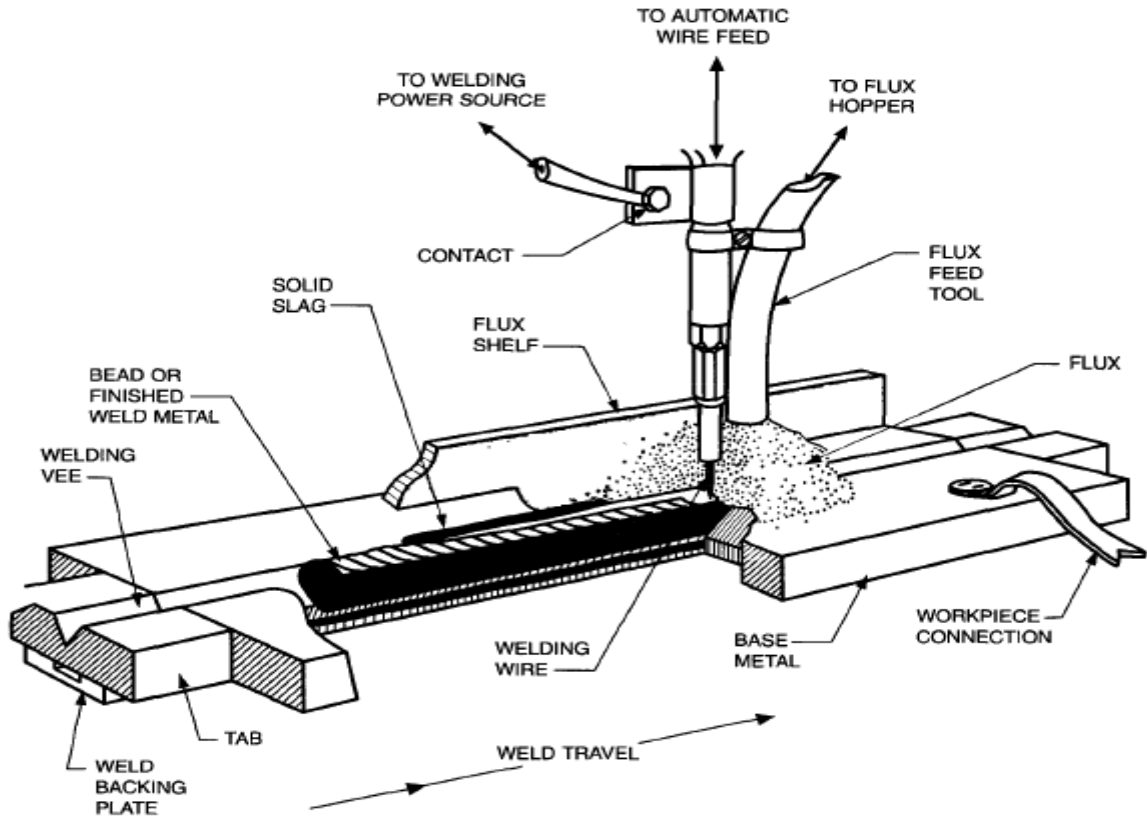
Schematic View of Submerged Arc Welding Process
